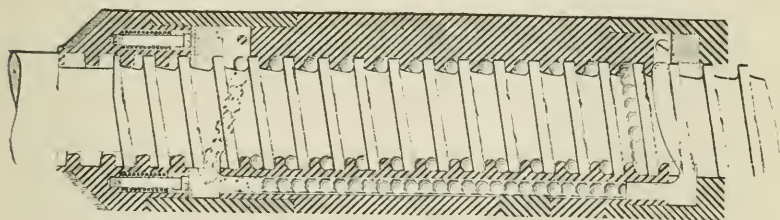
SECTION OF SCREW AND SLIDING NUT.
